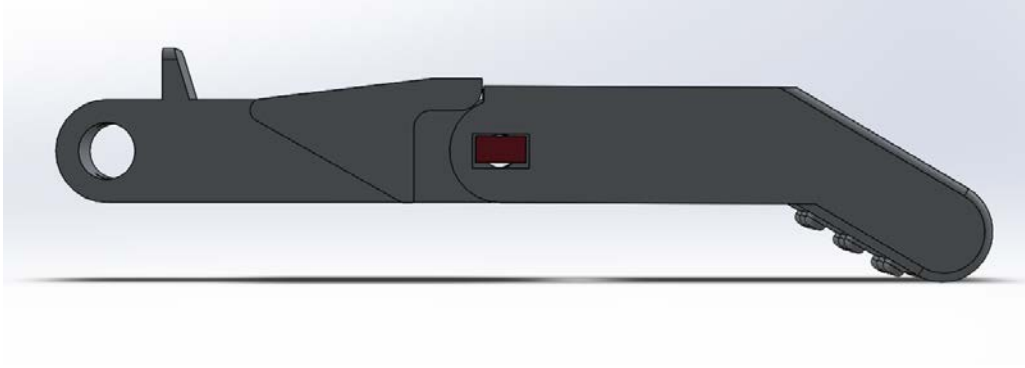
Two-Joint Finger; Sub-Assembly; Front View
